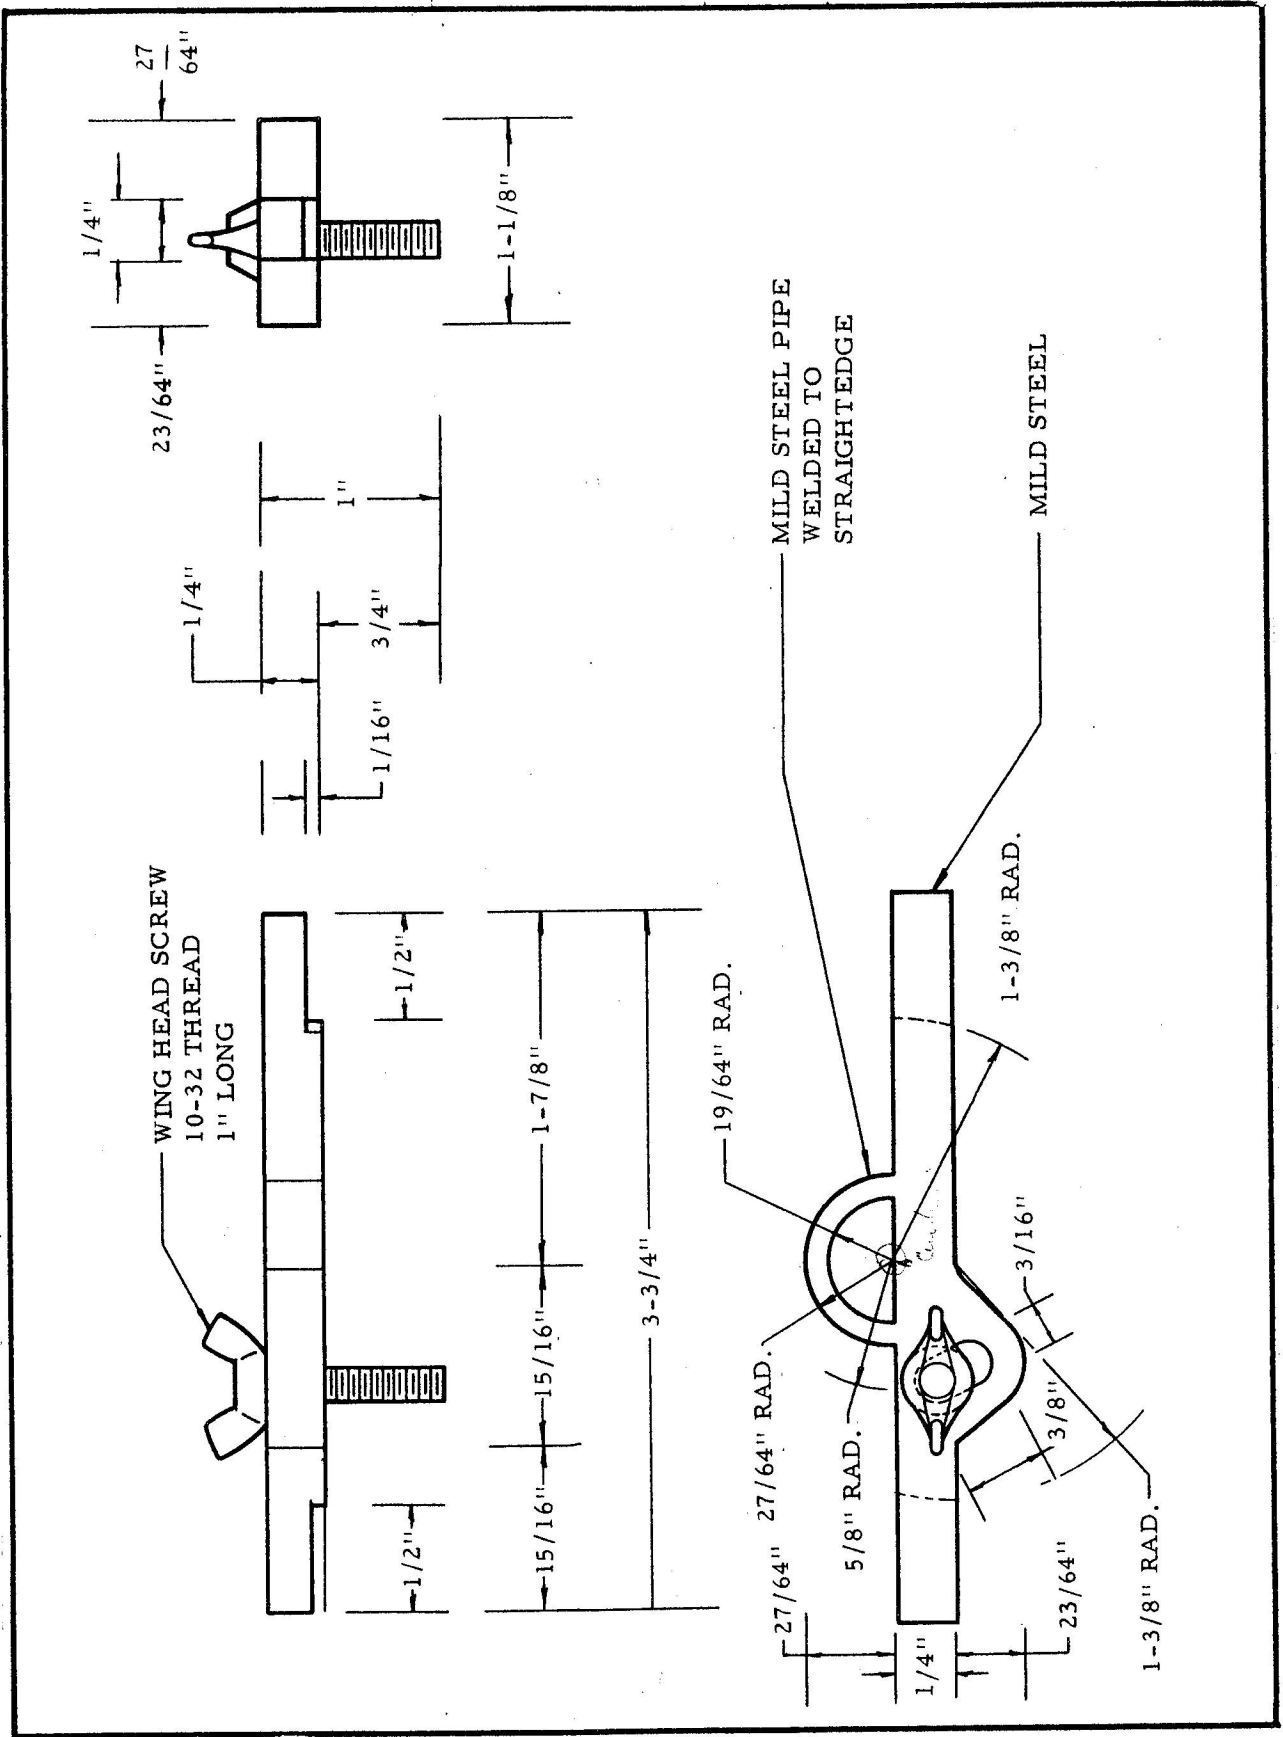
C Magneto Cam Step Locking Tool (Dimensions)
